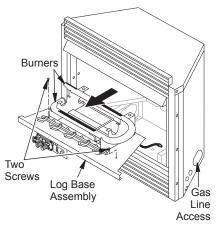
Removing Log Base Assembly From Fireplace Insert
